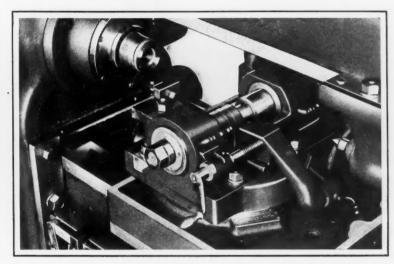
Hob Carriage from the Front, Showing the Hob-positioning Screw and Micrometer Dial
